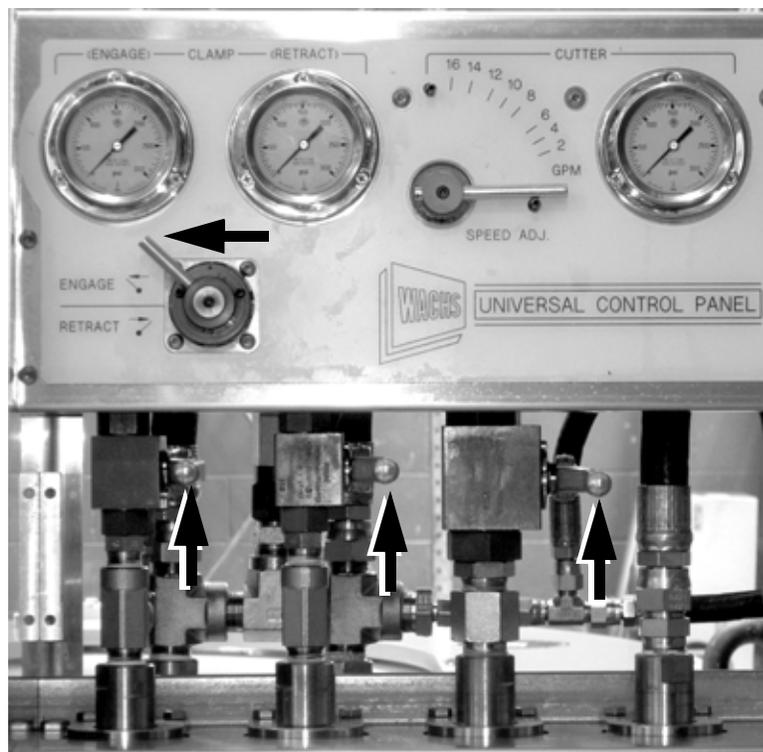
Before clamping, make sure that both clamping levers and the cutting lever are in the up position, and that the clamping direction lever is in the ENGAGE position.
